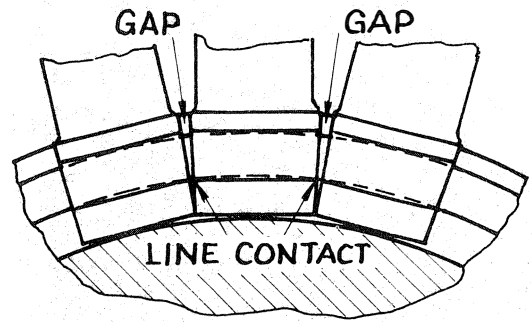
Blades not Conforming With Cylindrical Root Geometry.
